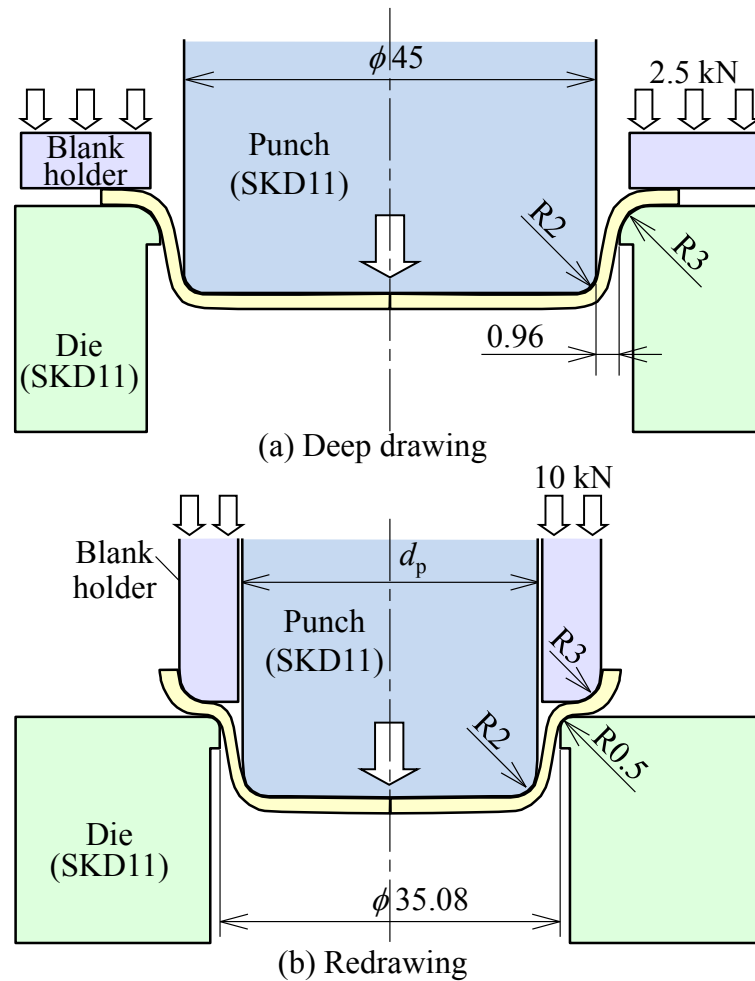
Conditions of deep drawing with large clearance between punch and die.
